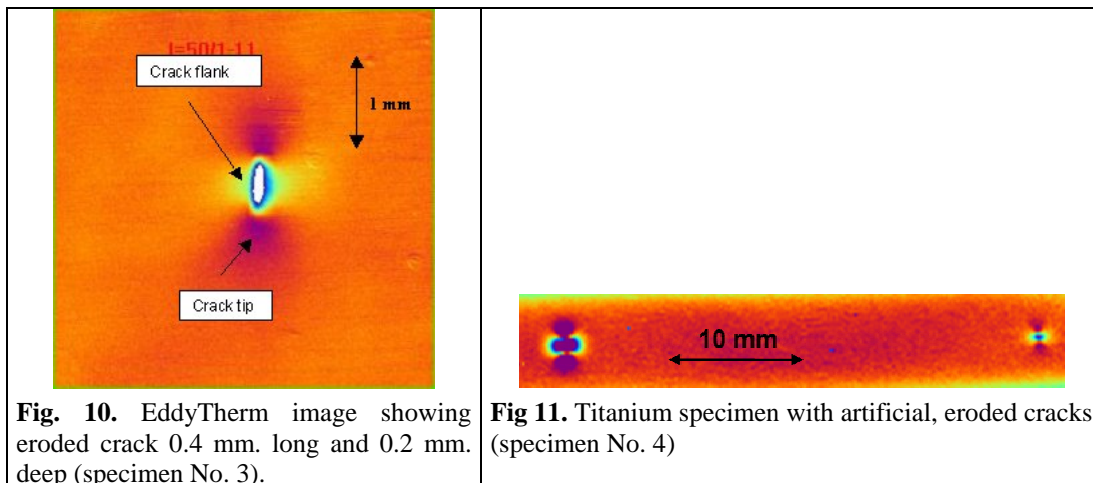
EddyTherm image showing eroded crack 0.4 mm. long and 0.2 mm. deep (specimen No. 3).
